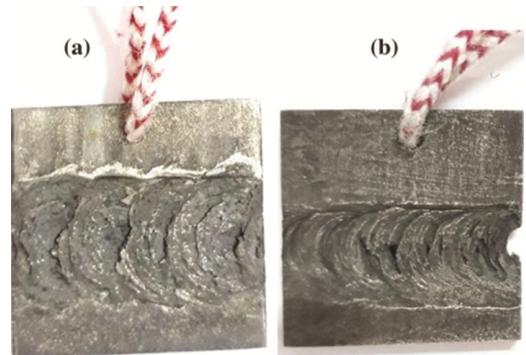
The specimen prepared (a) for corrosion test and (b) after corrosion testing
